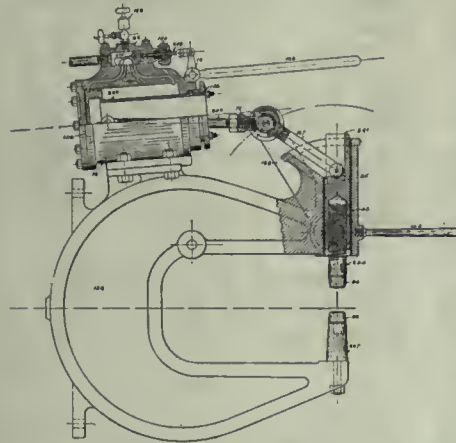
A PORTABLE PNEUMATIC RIVETER FOR STRUCTURAL, BRIDGE AND RAIROAD WORK AND BOILER AND TANK CONSTRUCTION.
